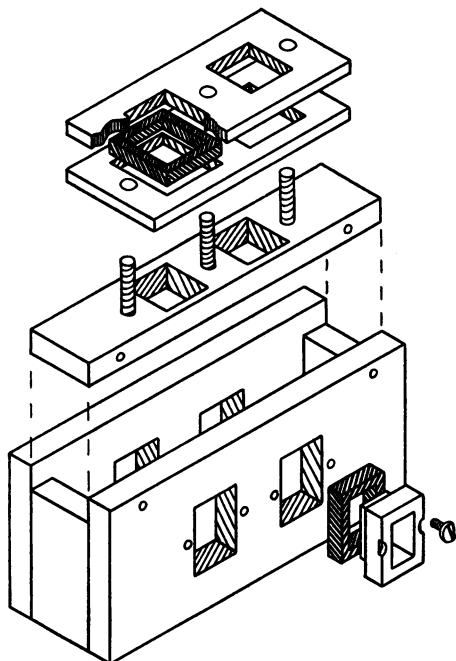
Isometric drawing of cell-holder showing details of assembly.
